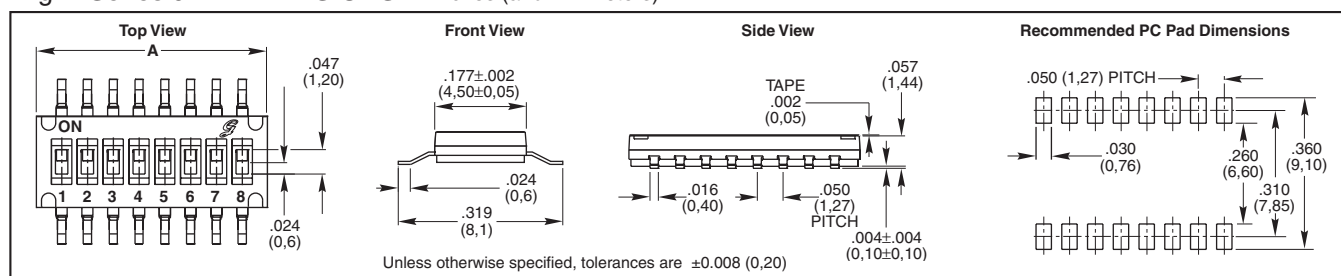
Series 97R DIMENSIONS In inches (and millimeters)
